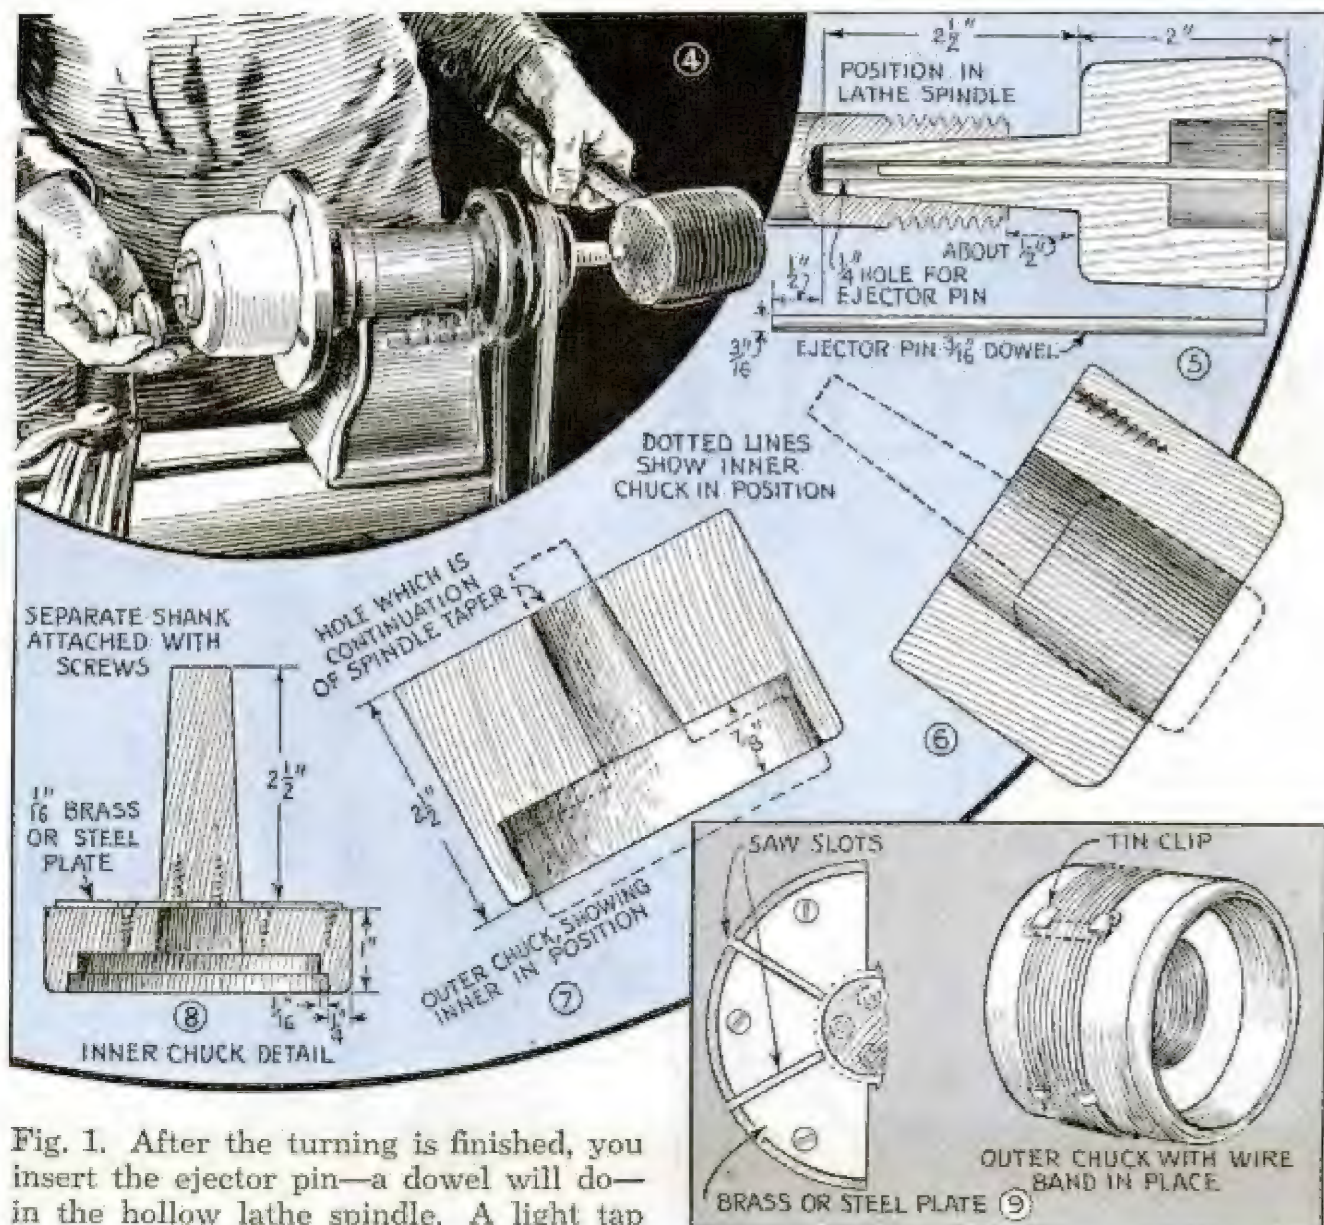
After the turning is finished, you insert the ejector pin—a dowel will do—in the hollow lathe spindle. A light tap on the pin will loosen the chuck and release the work. With blanks of uniform size, these two operations can be done without stopping the machine.
